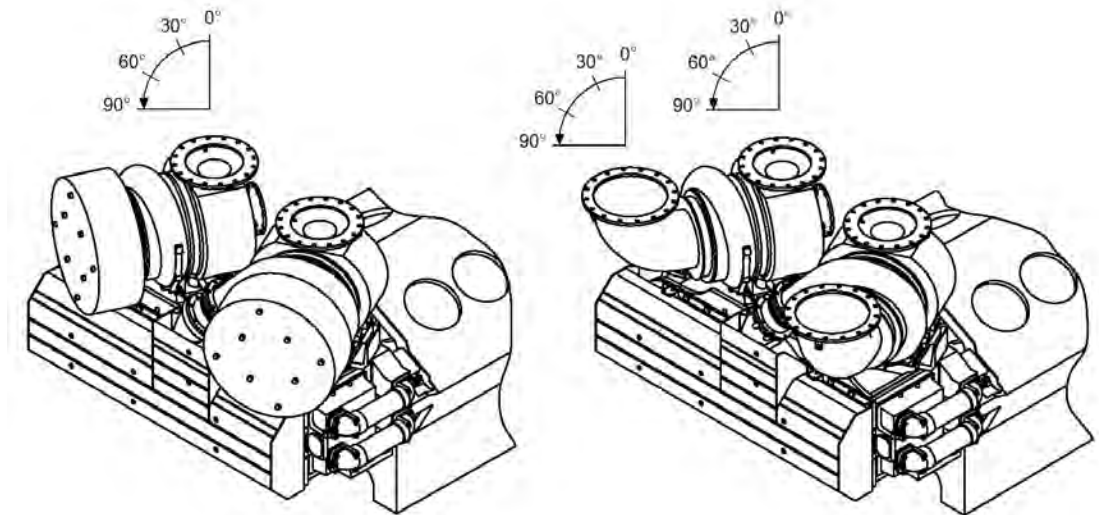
Exhaust outlet possibilities, 16V-engine
